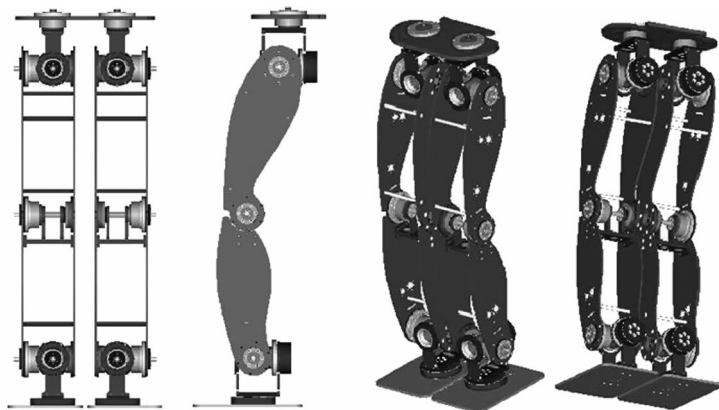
Mechanical drawings of the AMIO biped mechanism.
